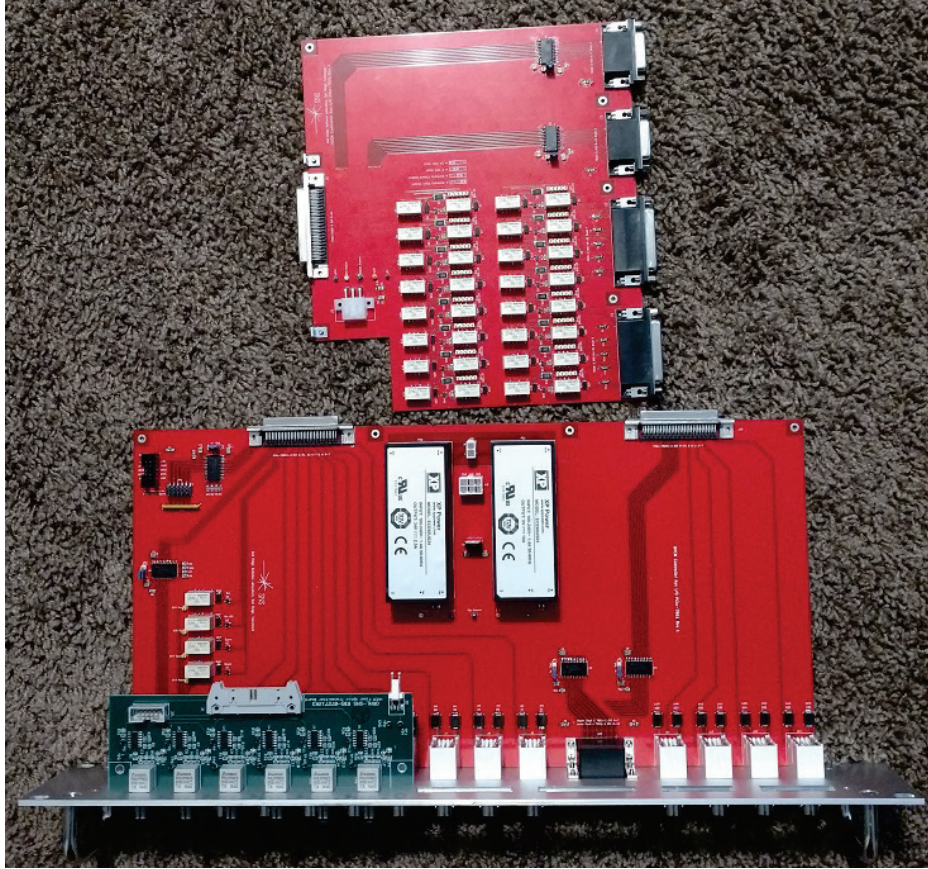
Fully assembled prototype auxiliary input/output PCBs ready for integrated testing.
